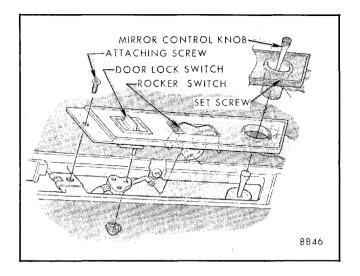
Door Armrest Cover and Remote Mirror Cable Attachment - K Style
